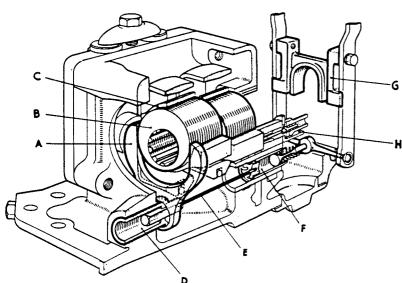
PUMP SHOWING OSCILLATING CONTROL VALVE MECHANISM
